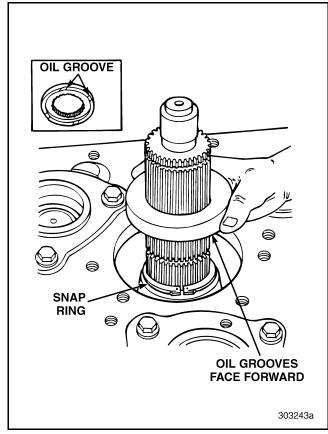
Installing Bearing Spacer (T313LR/T318LR Shown)
